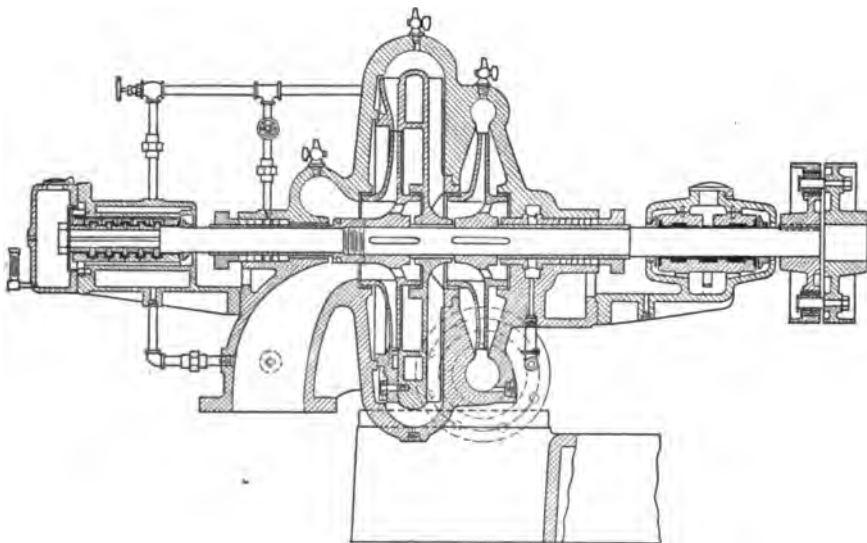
Longitudinal section of turbine pump, two stage. (Cameron Pump.)
